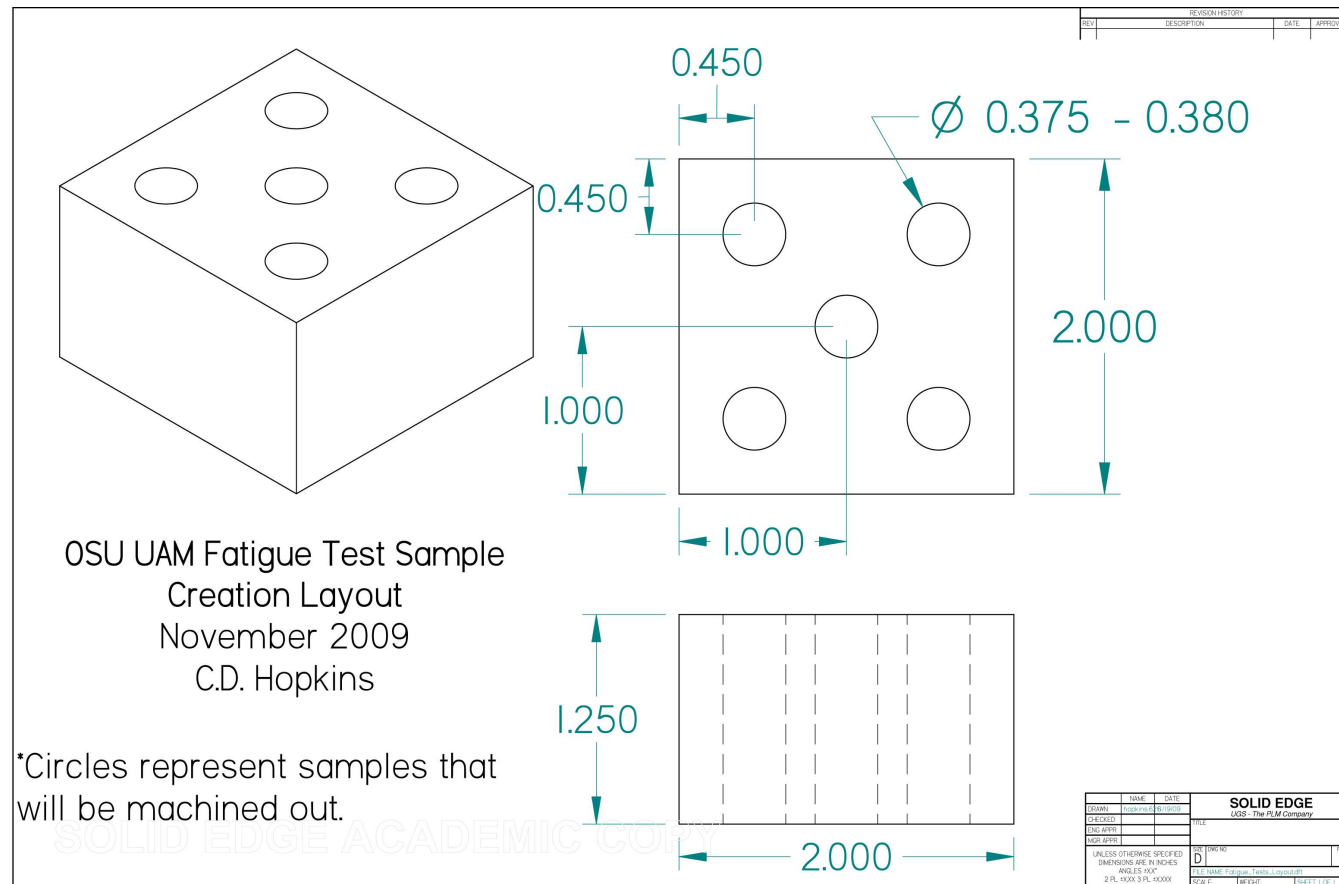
Nominal dimensions for blocks created for fatigue tests with holes representing location of sample extraction. All dimensions in inches.
